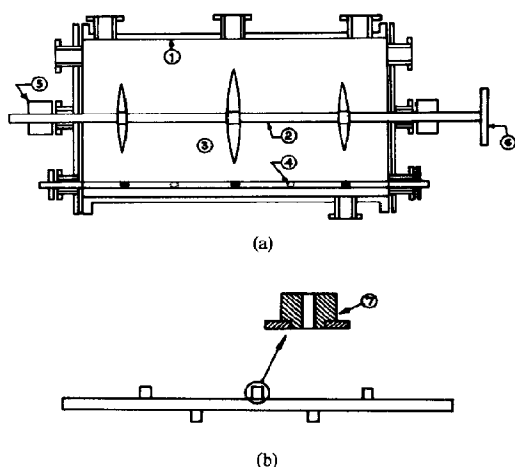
Horizontal agitated contactor. (1) Horizontal cylindrical vessel. (2) Impeller shaft. (3) Impellers. (4) Nozzle assembly. (5) Gland and stuffing box. (6) Pulley. (7) Nozzle.
